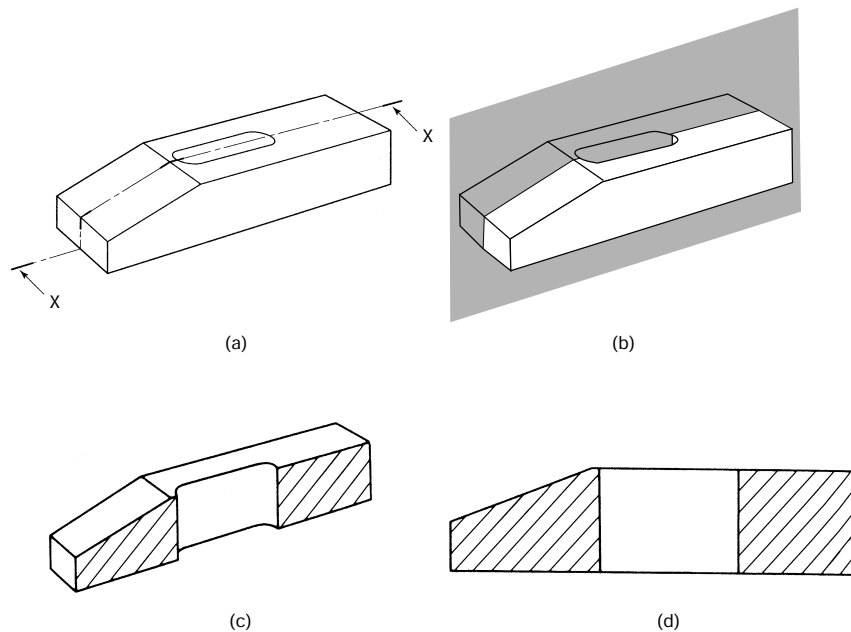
Section drawing: (a) the clamp is to be sectioned along line X–X; (b) the cutting plane is positioned on the line X–X as shown; (c) that part of the clamp that lies in front of the cutting plane is removed leaving the sectioned component; (d) sectioned orthographic elevation of the clamp shown in (a) – note that section shading lines lie at 45° to the horizontal and are half the thickness of the outline
